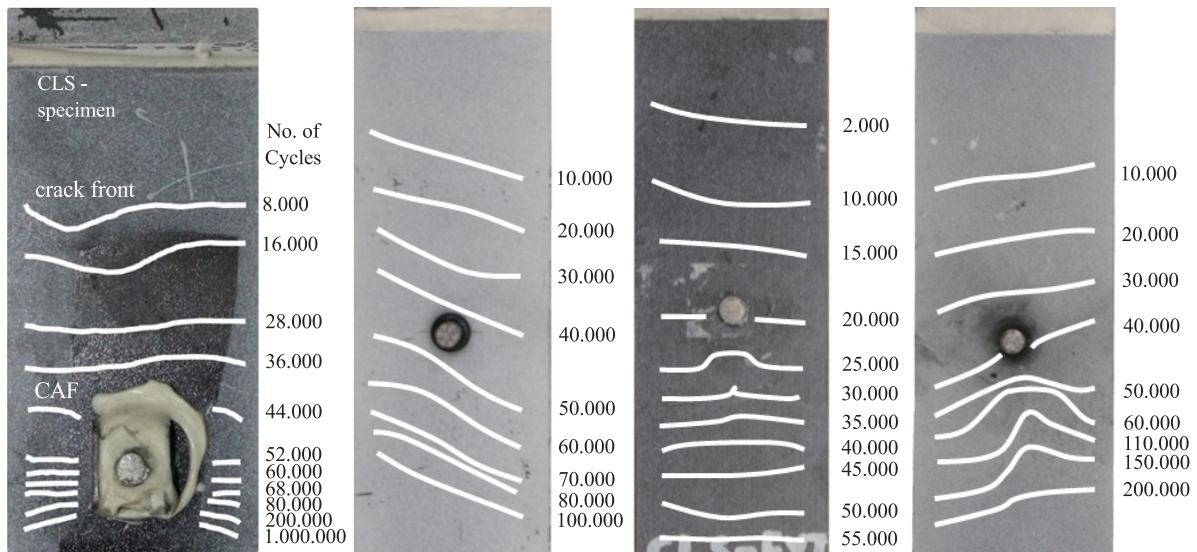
Crack front propagation of a hybrid joint configurations using different CAF (left to right): rivetless nut plate joint; pin with clearance fit; bonded pin; pin with press fit
